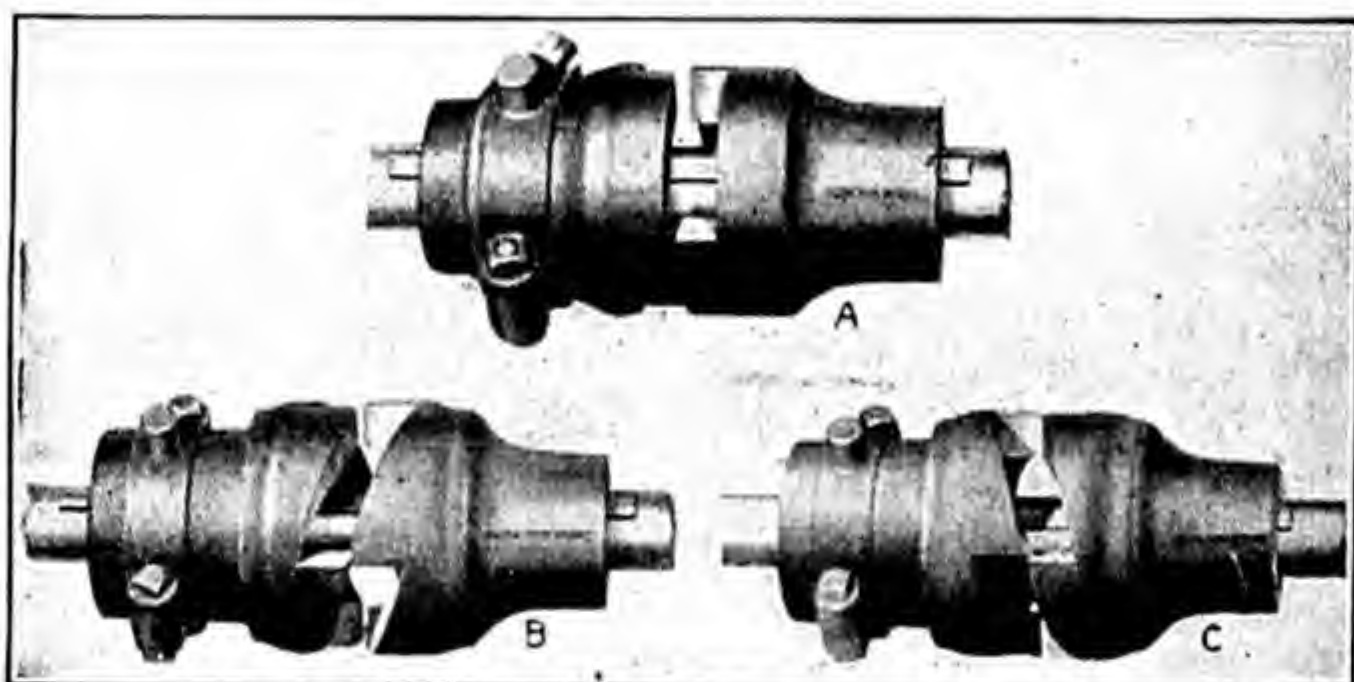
Types of positive clutch: A, square-jaw clutch coupling; B, left-hand spiral-jaw clutch; C, right-hand spiral-jaw clutch.
